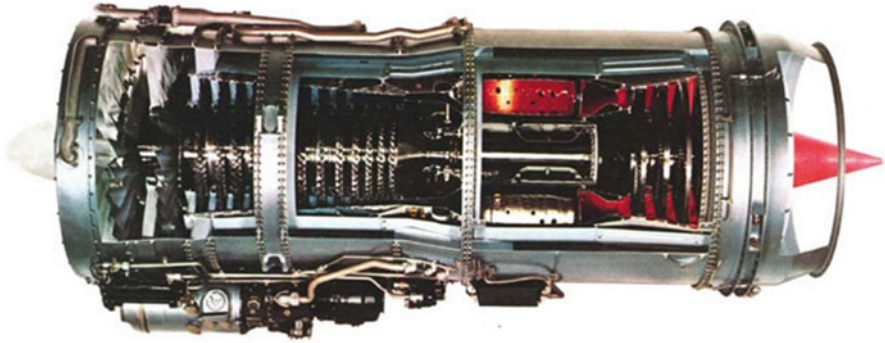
The sectional view of the JT8D engine (Pratt & Whitney 2014)
